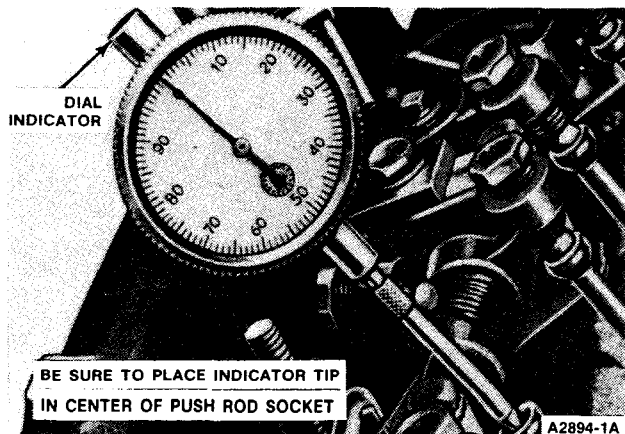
Measuring Camshaft Lobe Lift—Typical
